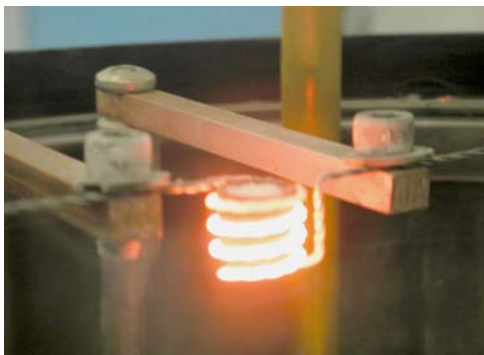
This filament-heated crucible is part of a salt coater used to apply a release layer to some molds before casting.
